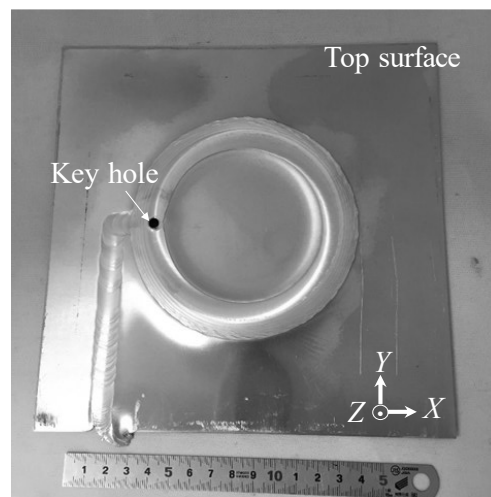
Appearance of forming results of PTFSIFed sheet of concave shape.
